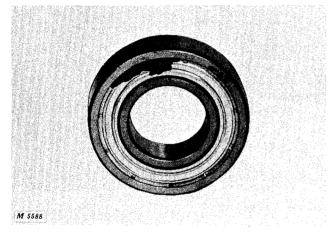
Oil Seal Damage Caused by Careless Installation with Sharp Tool
